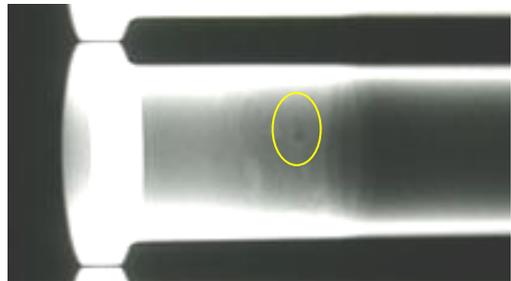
X ray image of an electron beam welded connection tube containing a defect indication.
